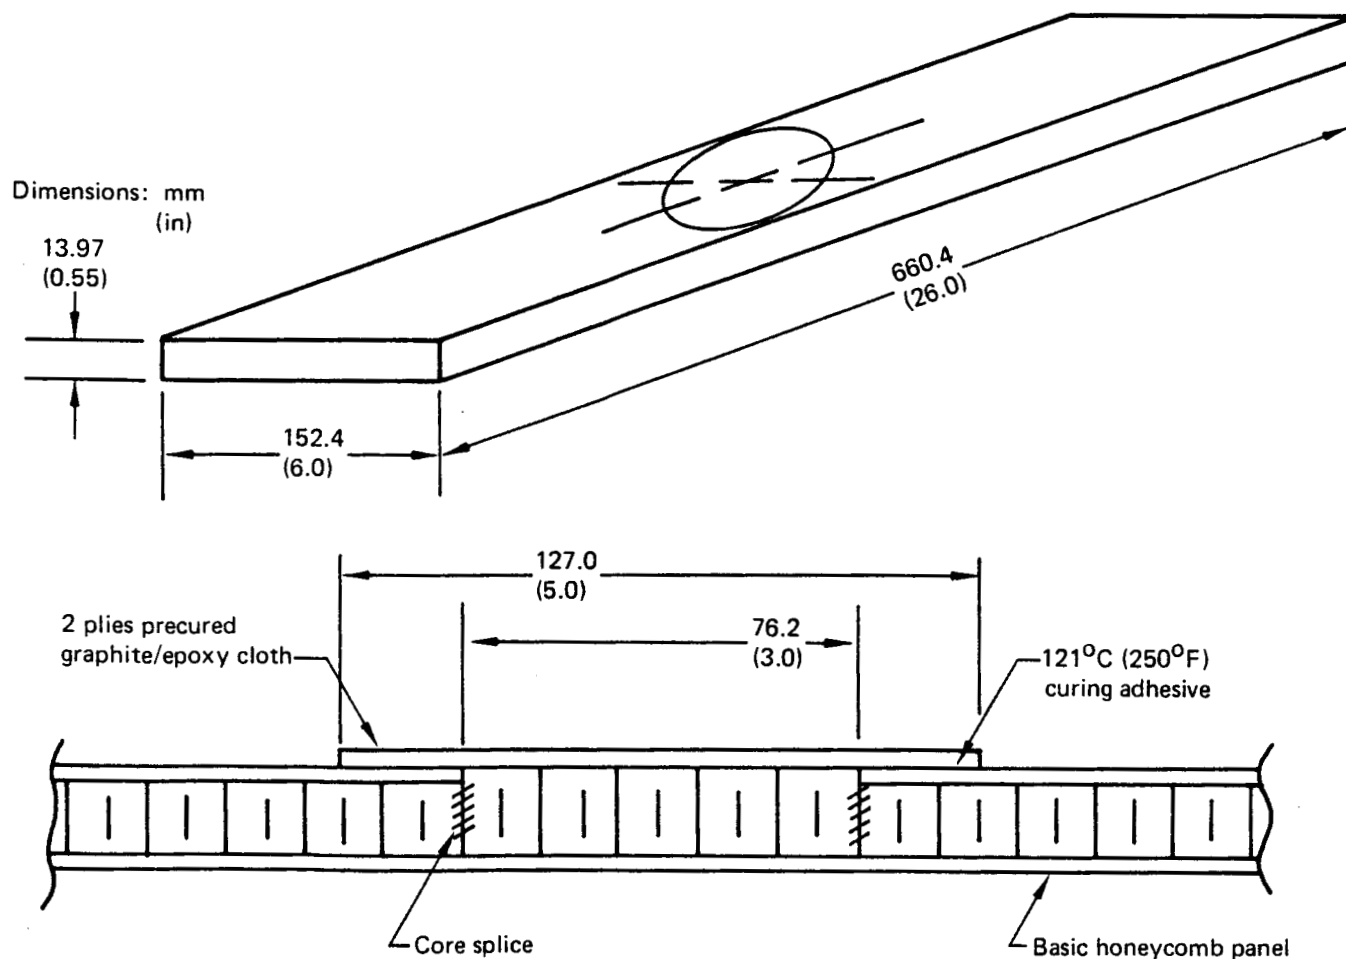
Four-Point Beam Honeycomb Repair Specimen (Drawing 65C17721)
